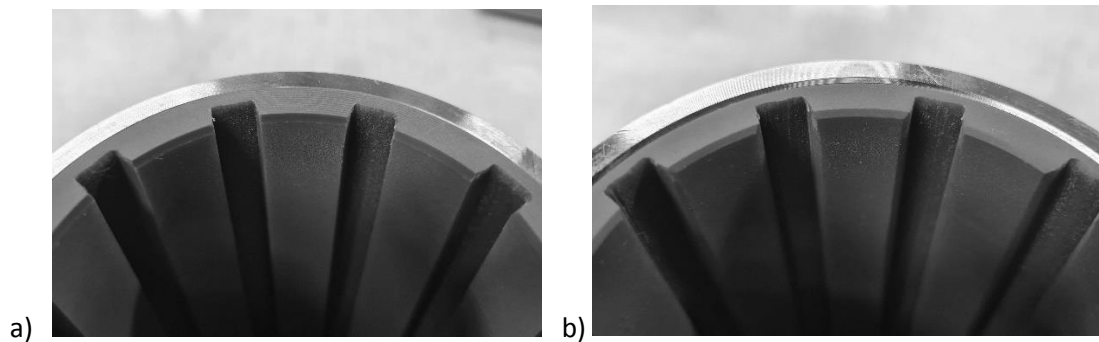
Two styles of the lubricating groove edges a) sharp edges, b) chamfered edges.
